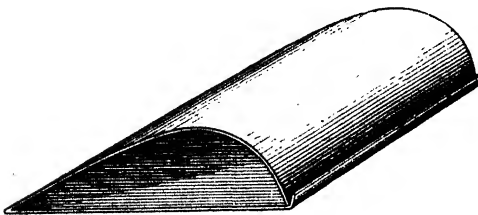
BENDING JIG FOR SHAPED PANELS
